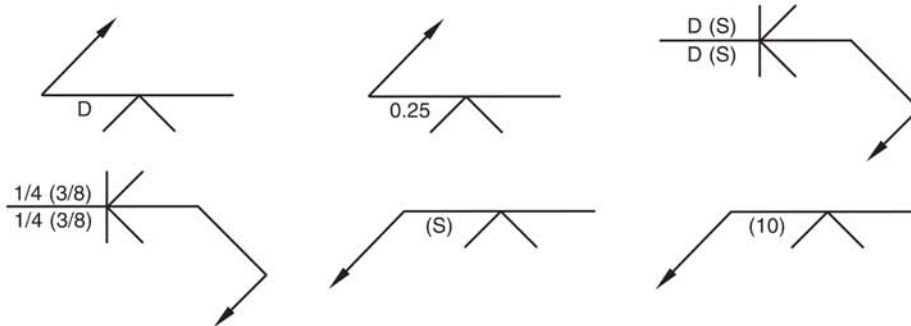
Application of Dimensions to the Groove Weld Symbol
